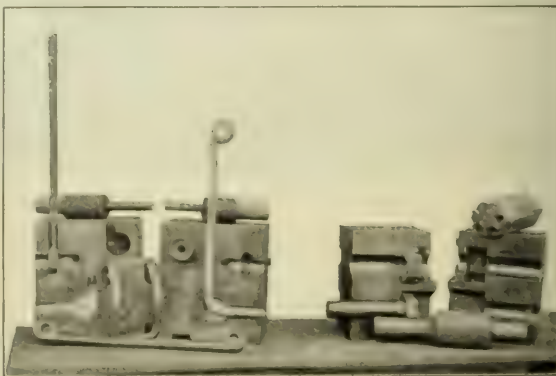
Dies for Upsetting and Punching Brake Hanger Ends and Forging Castle Nuts.
